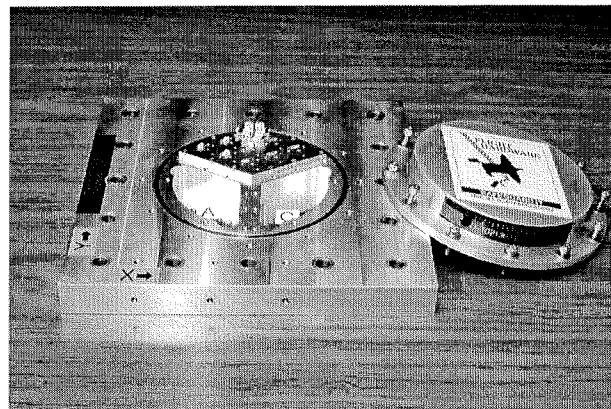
1 of 3 sample "slices" mounted on the vibration fixture with the hermetic cover removed.
